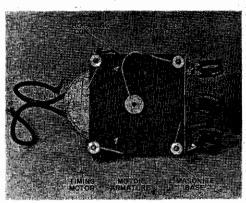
Curve the rotating contact to get a gentle spring-like action. Contact and motor leads should be long enough to allow assembly without stress.
